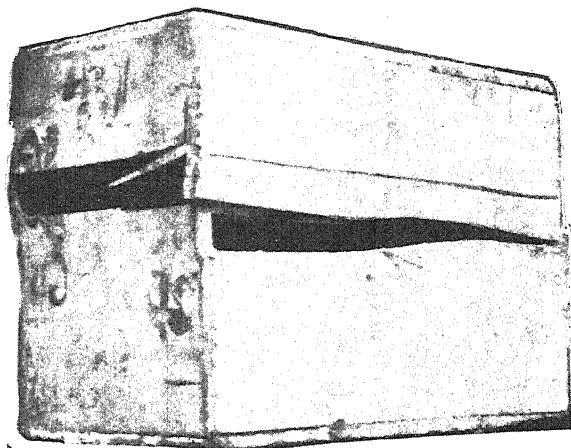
TYPICAL FAILURE OF UNSTRAPPED BOX (EIGHT NAILS PER NAILING-EDGE).
